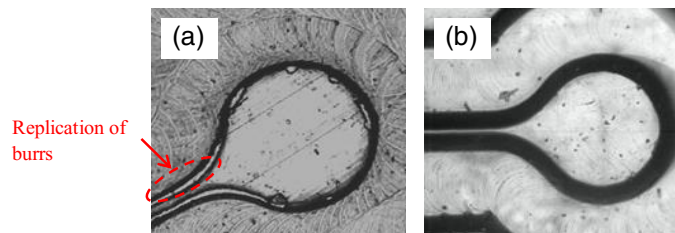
Embossed features on PMMA (a) Embossing mould produced using straight tool, (b) Embossing mould using 50° taper angle tool, with down milling and without finish face milling pass.
